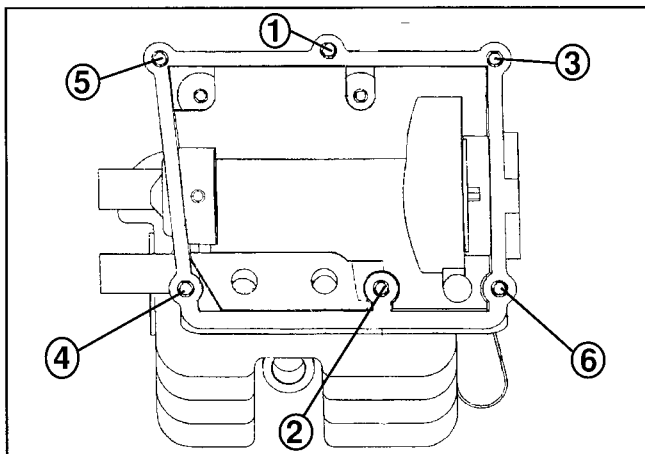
Valve Cover Tightening Sequence - #2 Side.
